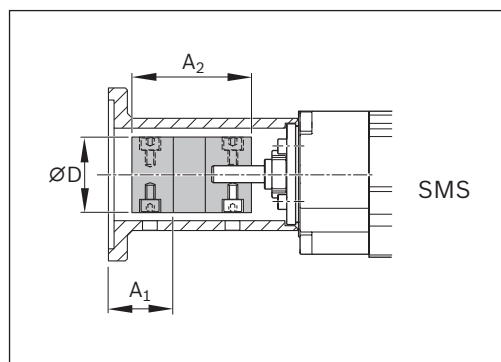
Mounting the motor with flange and coupling (SMS-040 – SMS-120)
